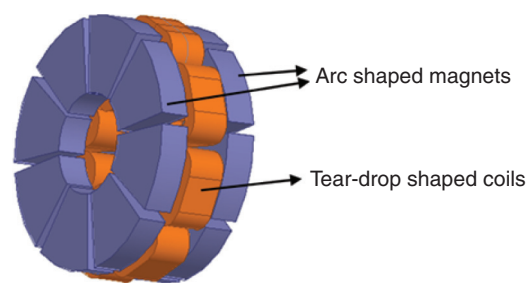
A CAD model of the “double rotor-single stator slotless axial flux generator” without fixtures
